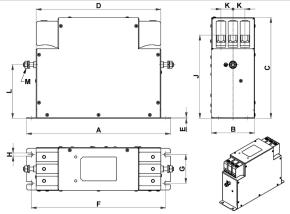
Dimension drawing of FN 3287 series filters (unit: mm)
